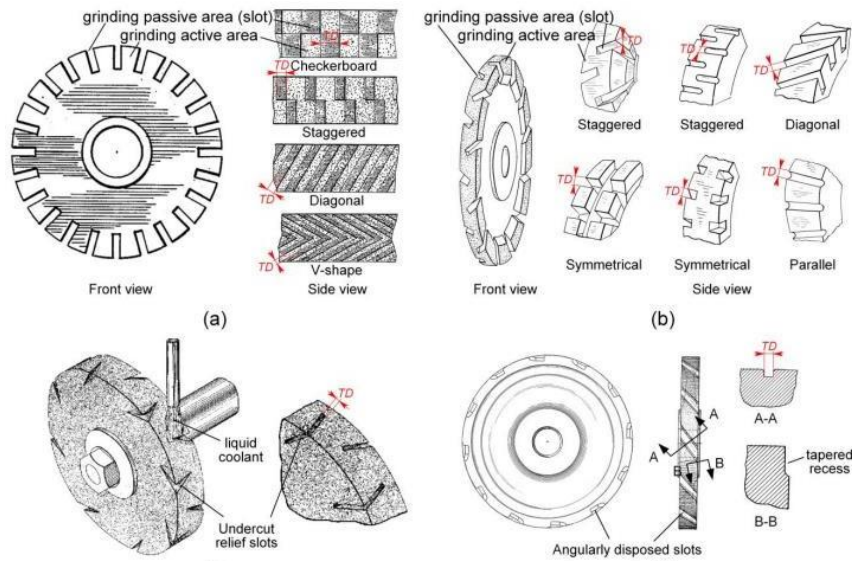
View of grinding wheel (Li & Axinte, 2016).
